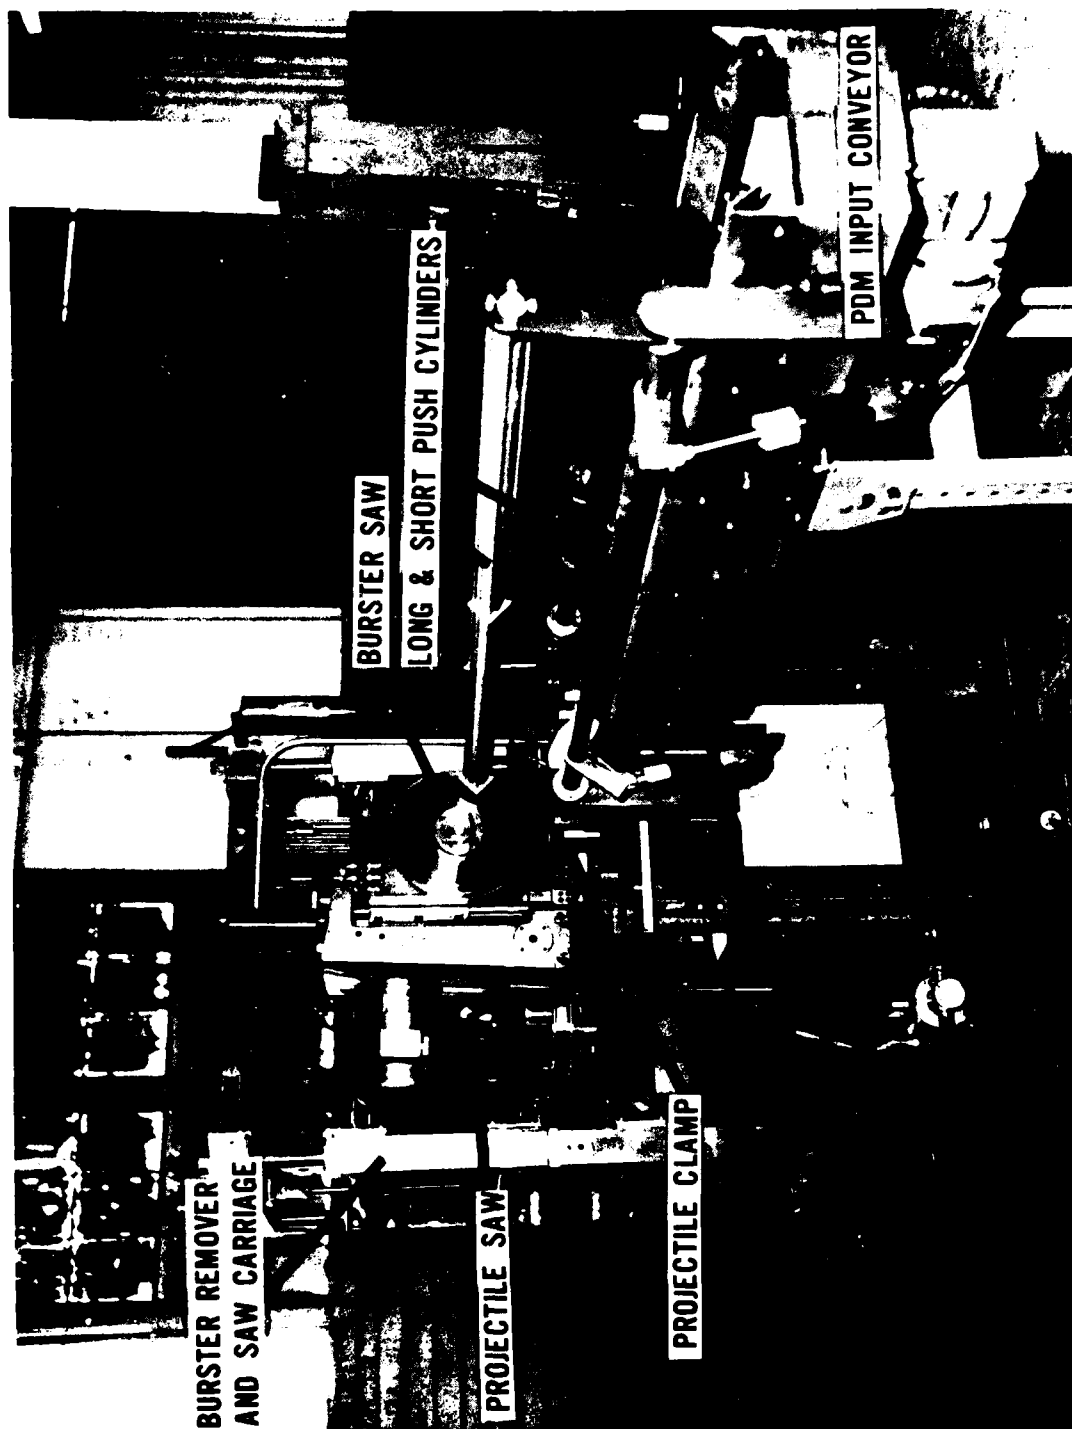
PROJECTILE DEMIL MACHINE
